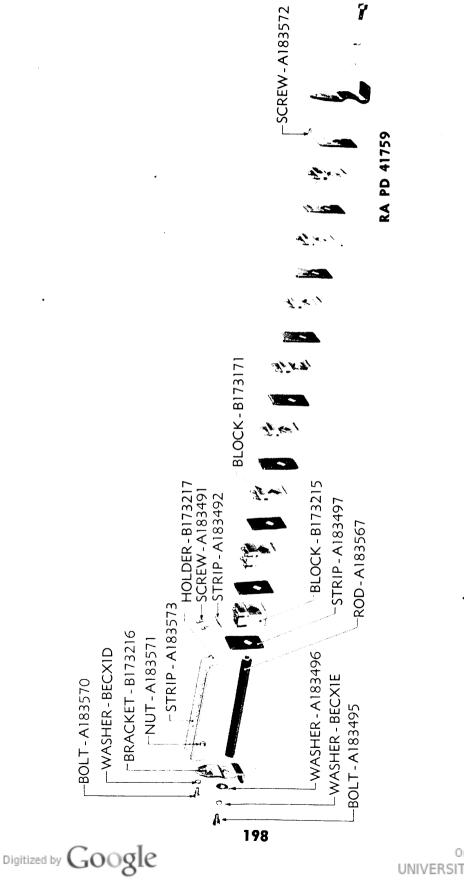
Distribution Box Assembly-Terminal Block Assembly C78502-Exploded View
